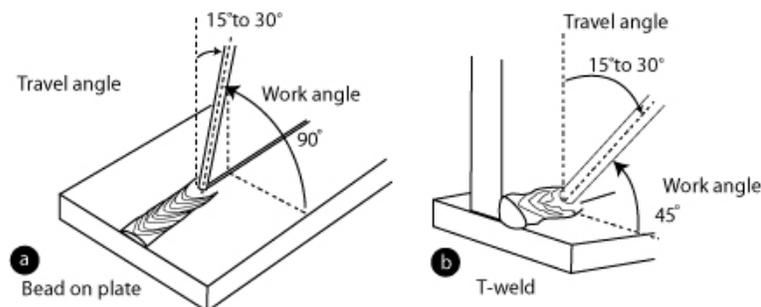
A Diagram Illustrating the Two Welding Positions a) Bead-on-Plate and b) T-Weld
